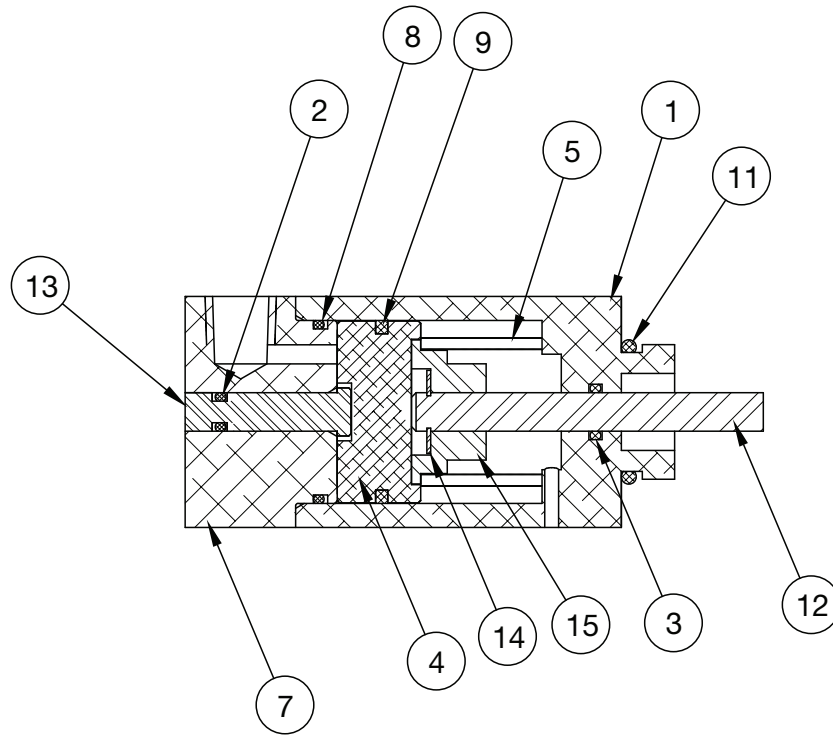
68710SS Valve Assembly TC (JAS models only)
